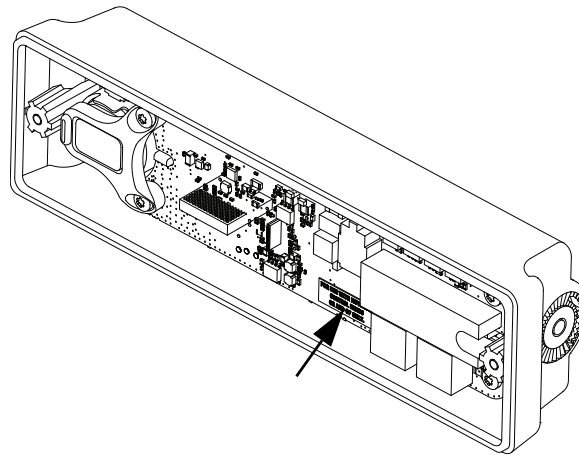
O2 and O7 Control Head Interface Board (CHIB)
